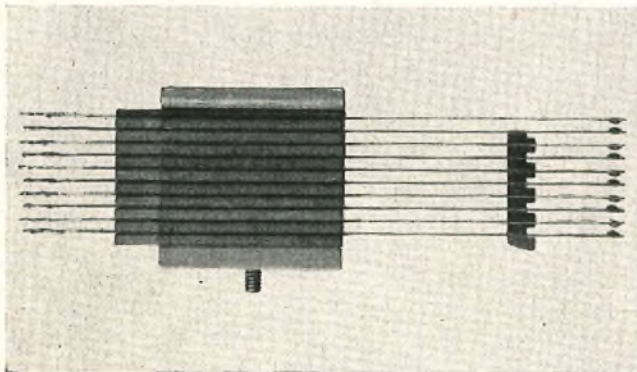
THE 5-MAKE-CONTACT SPRING-SET
